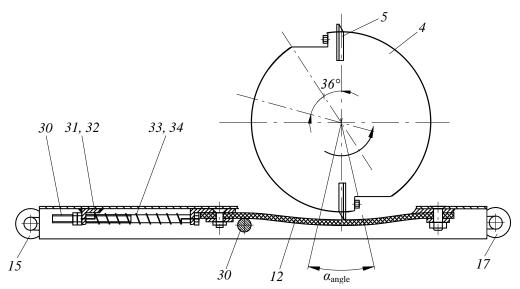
Scheme of the table with an improved stop belt and its fastenings.
